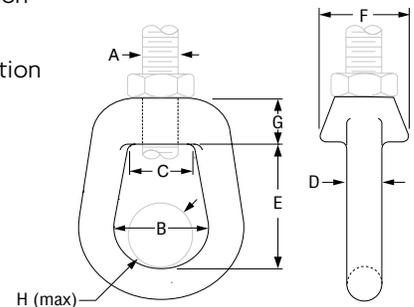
, 290L: LOADS (LBS) • WEIGHTS (LBS) • DIMENSIONS (IN)
